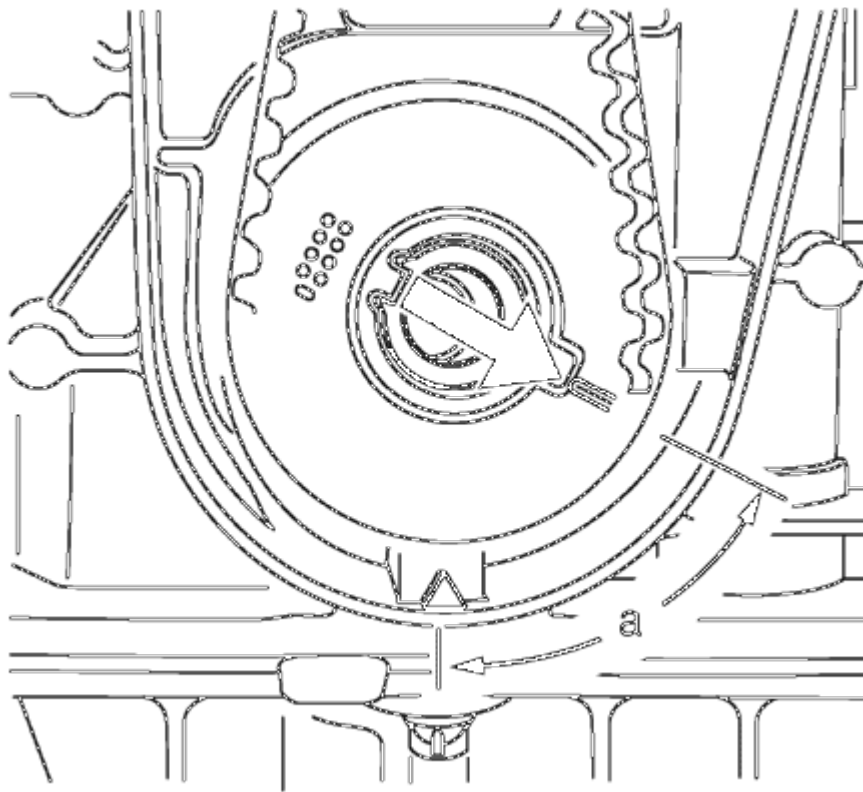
Turning Crankshaft Against Direction Of Engine Rotation
